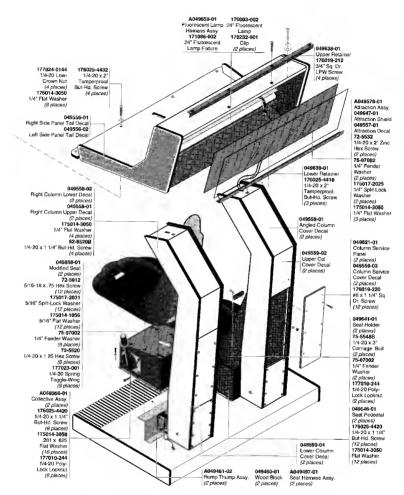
Cabinet-Mounted Assemblies, Front View, Continued A049570-01 D
